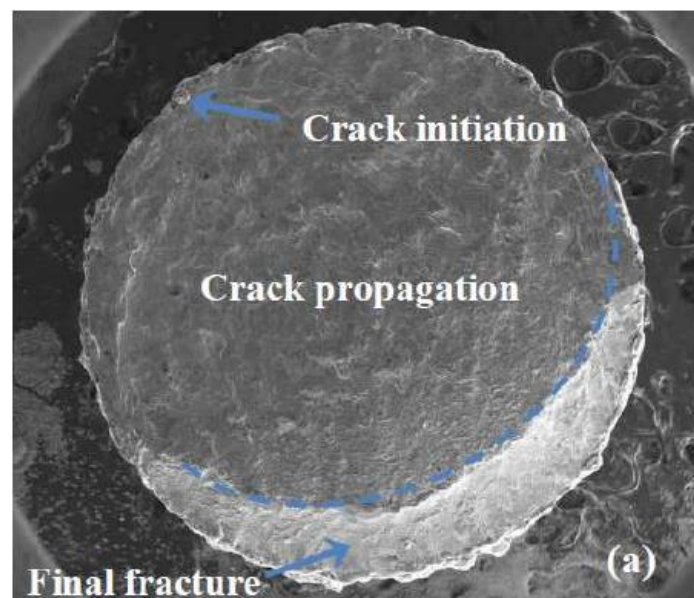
Zones of fatigue crack initiation, propagation and final fracture [93]
